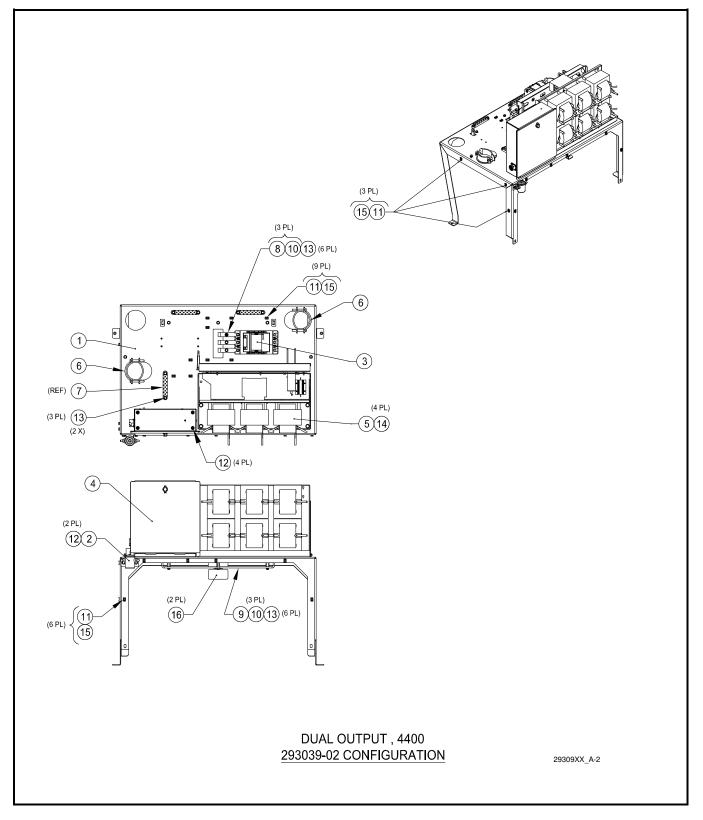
Output Table Assembly, 4400 (Sheet 1 of 2).
